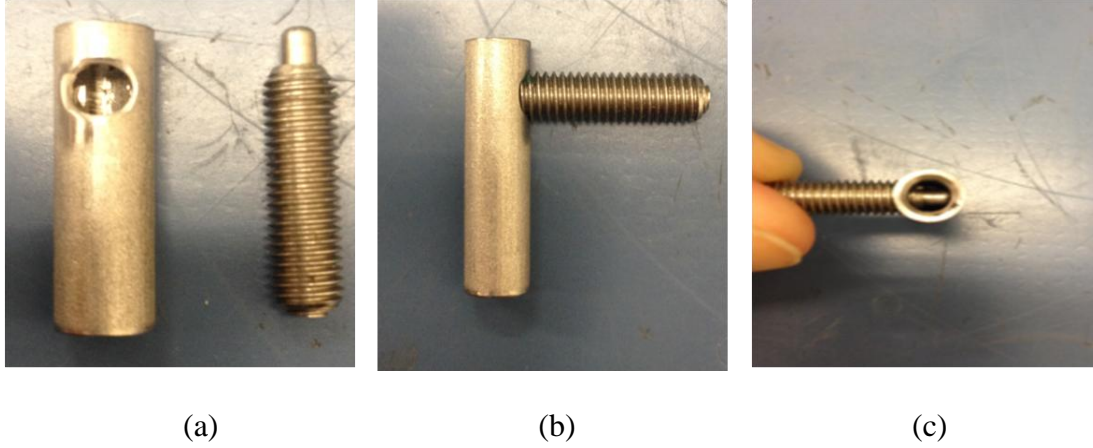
Pitot tube style probe holder assembly with a) probe housing and plunger screw, b) plunger screw inserted into the probe housing, and c) ball bearing tip in the probe housing.
